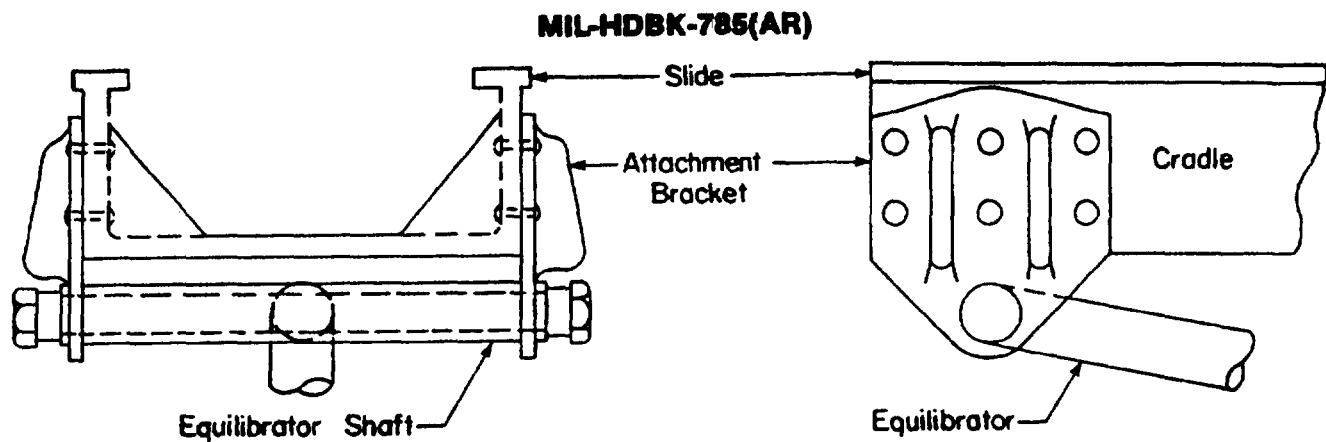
Equilibrator Attachment, Simple Beam Type
